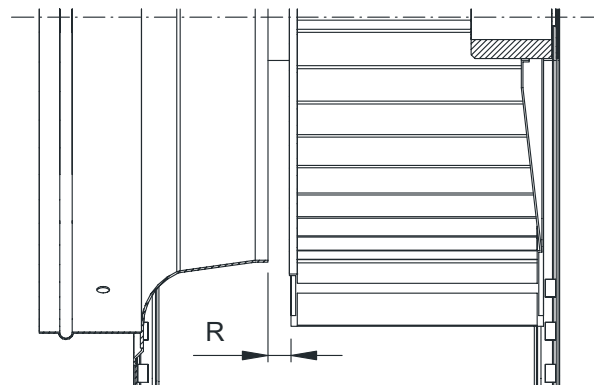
Assembly of LF impeller and the inlet cone. The distance between the impeller and the side plate inlet opening T should be as equal as possible for its entire length.
